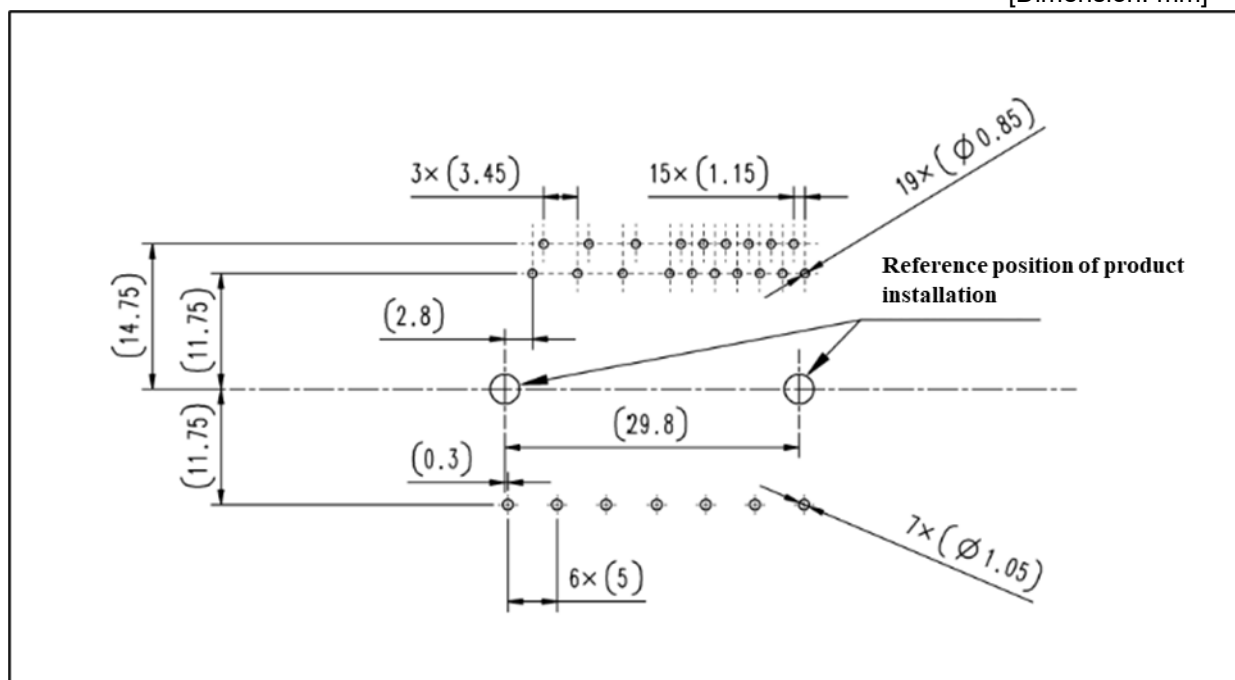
PCB through-hole pattern of SiC SLIMDIP (Reference Figure)
